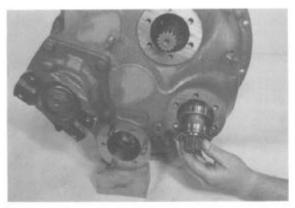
From rear of housing remove pump drive shaft and bearing assembly.
